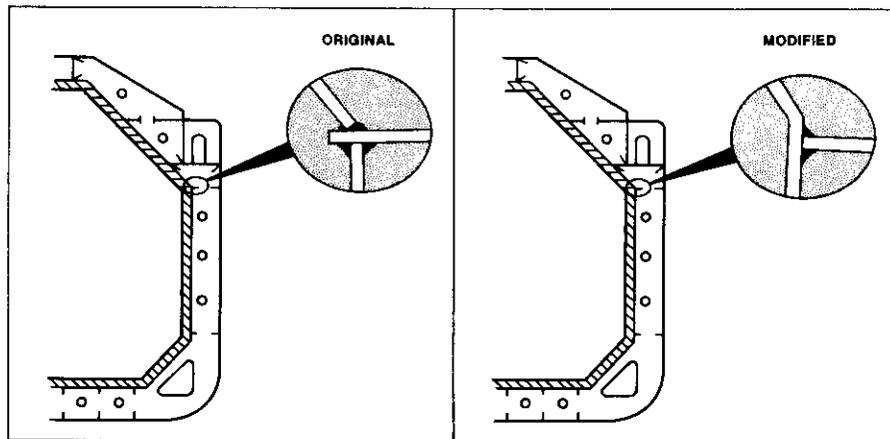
Fig. VII. STRUCTURAL DETAIL, WELDING DESIGN
